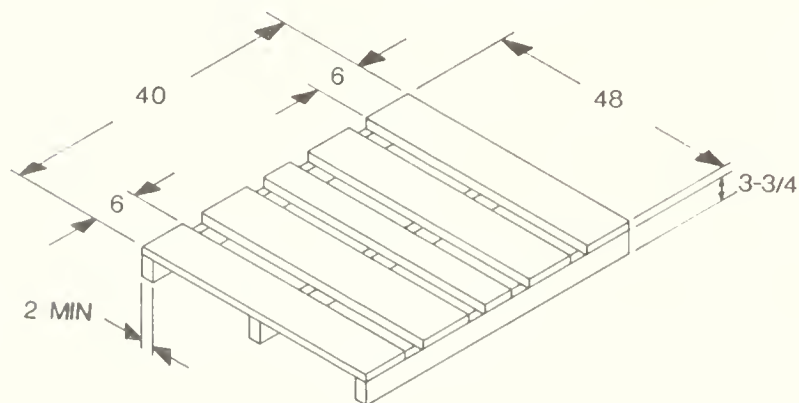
One-way entry pallet. Dimensions are in inches.
